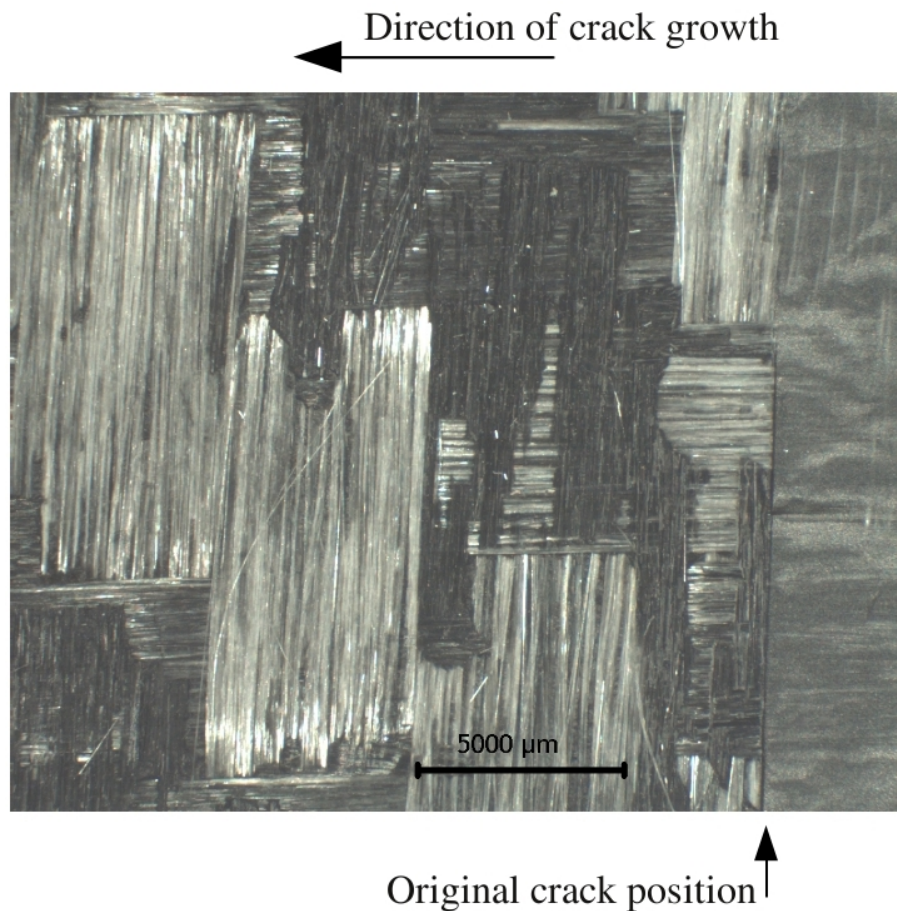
Photograph of fracture surface of a GFPP Single Leg Bend specimen
